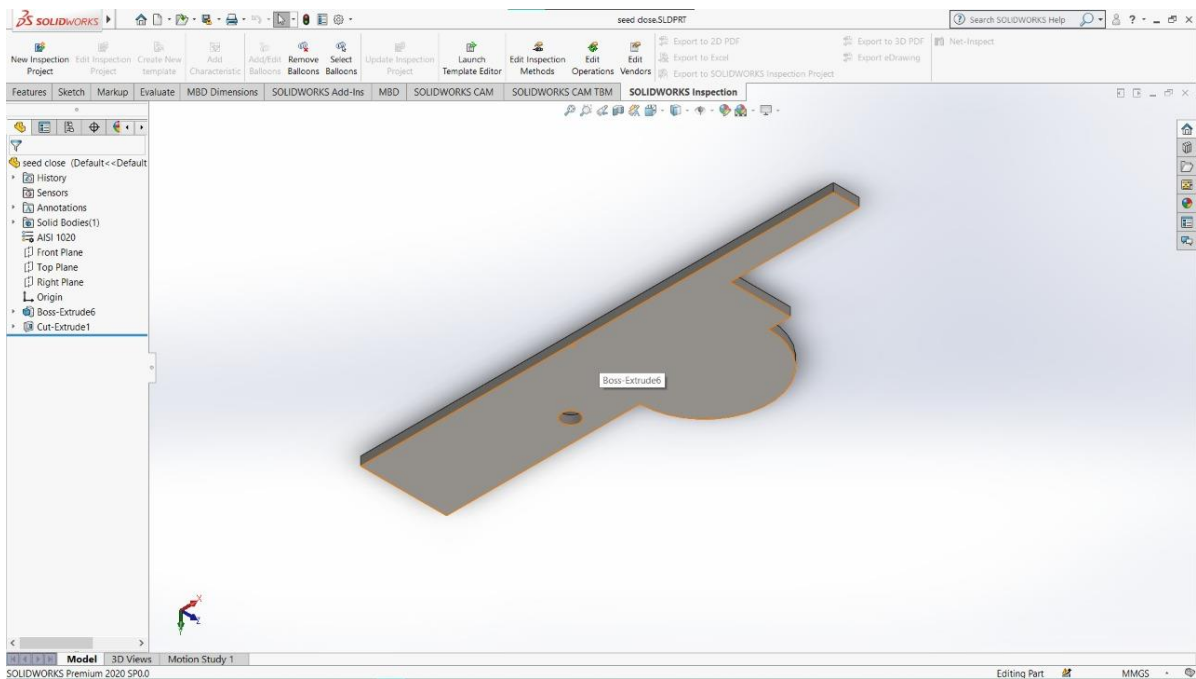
(Seed Dispensation Part Design in SolidWorks)
